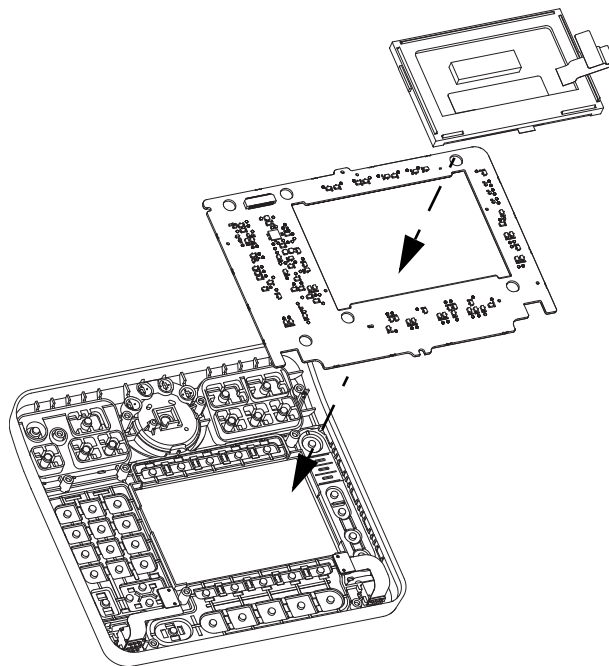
Assemble Front Keypad PCB and LCD Display
